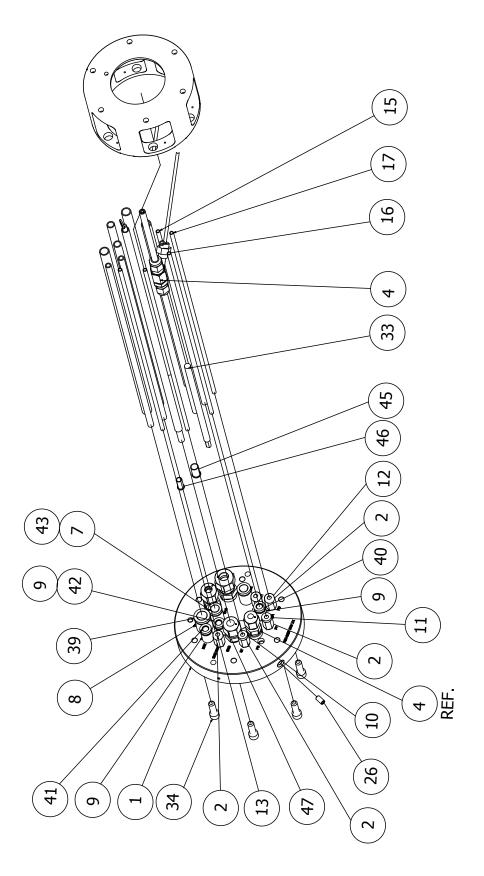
A11678-XXXXX Tubing Bundle Assembly
